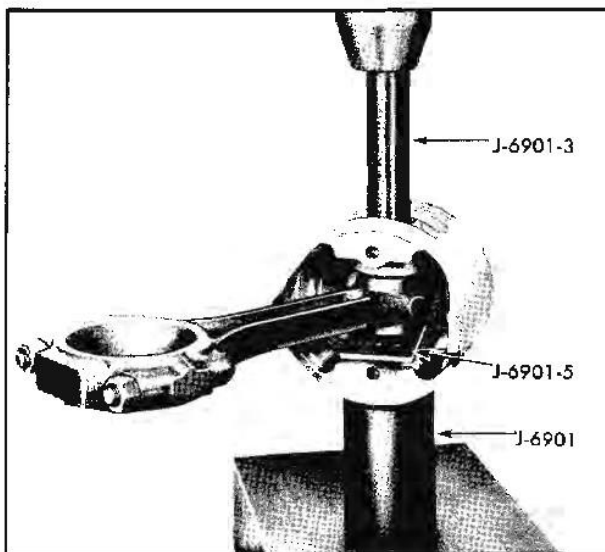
Piston Positioned in Arbor Press for Removal of Pin
